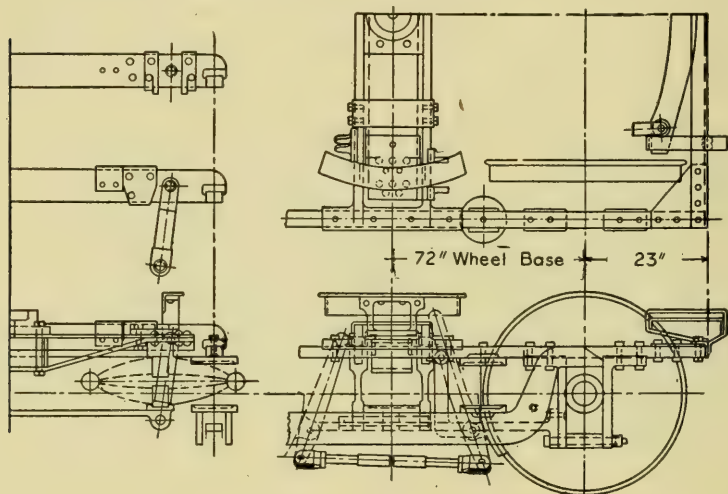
General Drawing of Baldwin Truck for Car 284.
